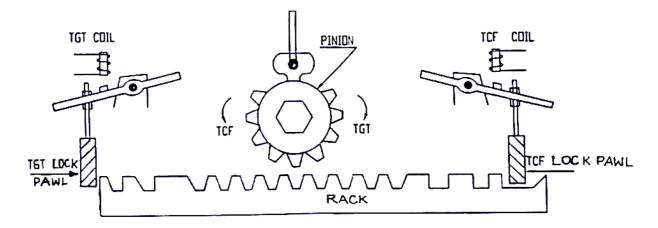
REAR VIEW OF THE RACK AND PINION IN THE LINE CLOSED POSITION OF THE BOTTOM HANDLE
